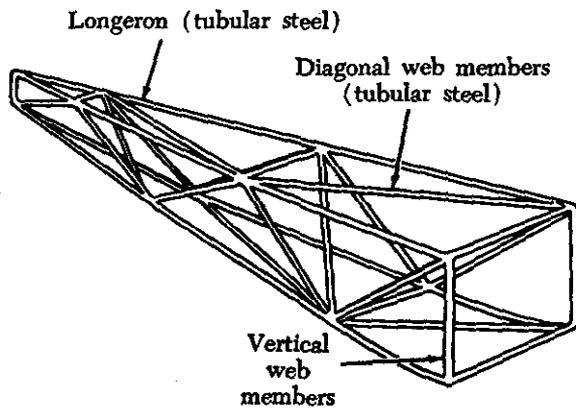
Warren truss of welded tubular steel.
